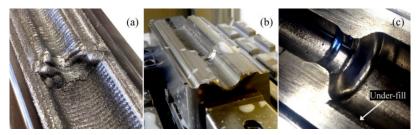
Manufacturing of laser clad insert. (a) Post laser cladding (b) rough machining and (c) machined condition.
